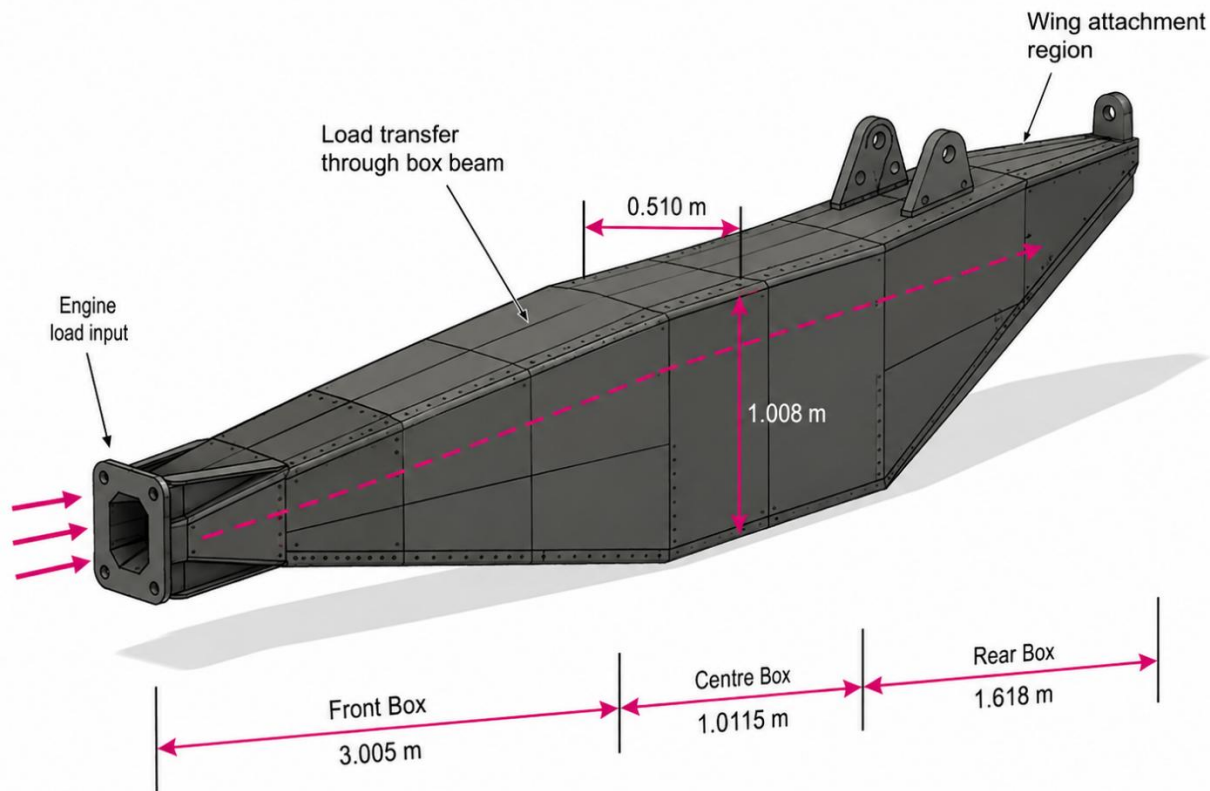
Representative external geometry and principal dimensions of the box-beam engine pylon.
